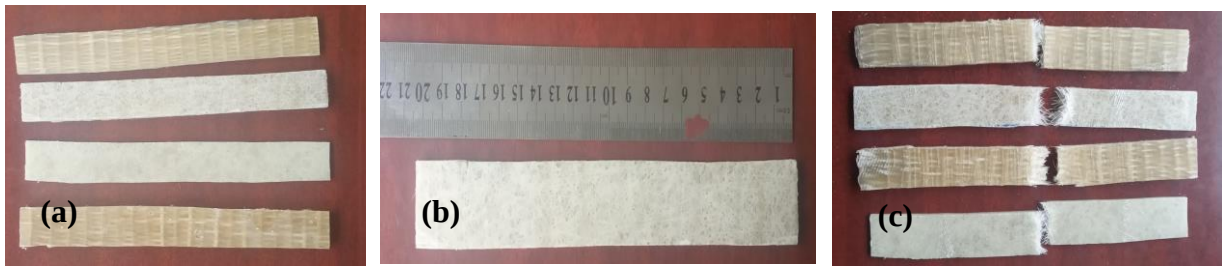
(a) Prepared samples (b) Sample dimension (c) Fractured samples of tensile test
